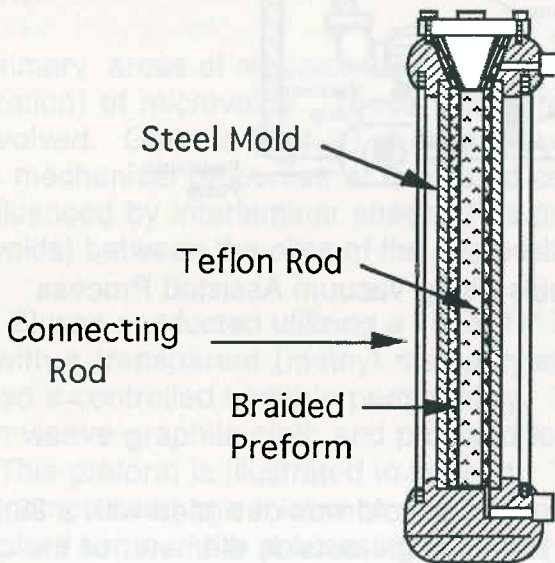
, Sketch of Mold 2 - Teflon Rod Type
